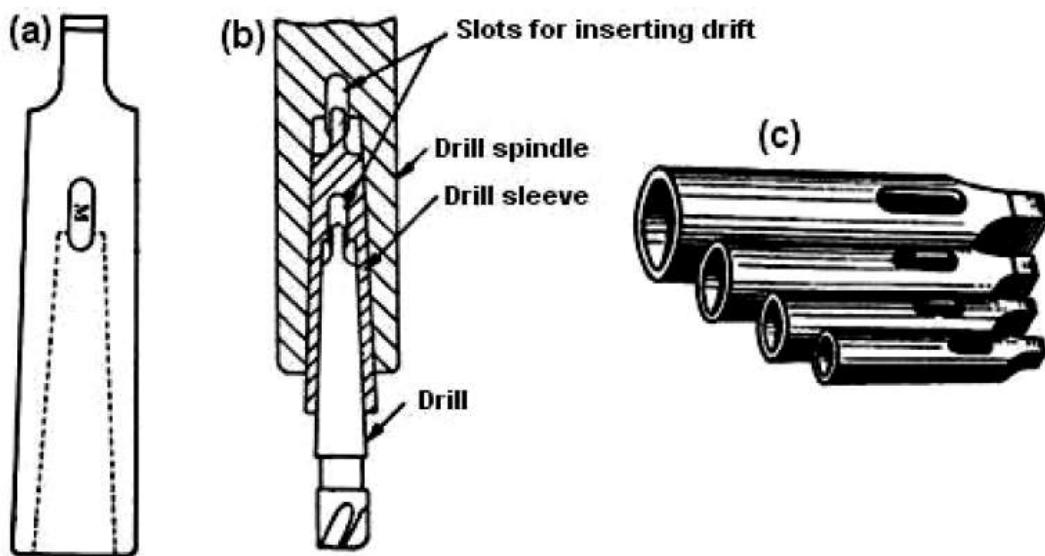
(a) Drill sleeve (b) Drill sleeve holding a drill fitted in the drill spindle and (c) Different sizes of drill sleeves.
